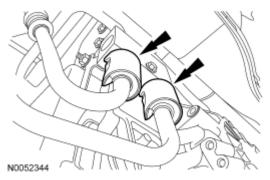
Locating Secondary Latches On Transmission Fluid Cooler Tubes Courtesy of FORD MOTOR CO.
